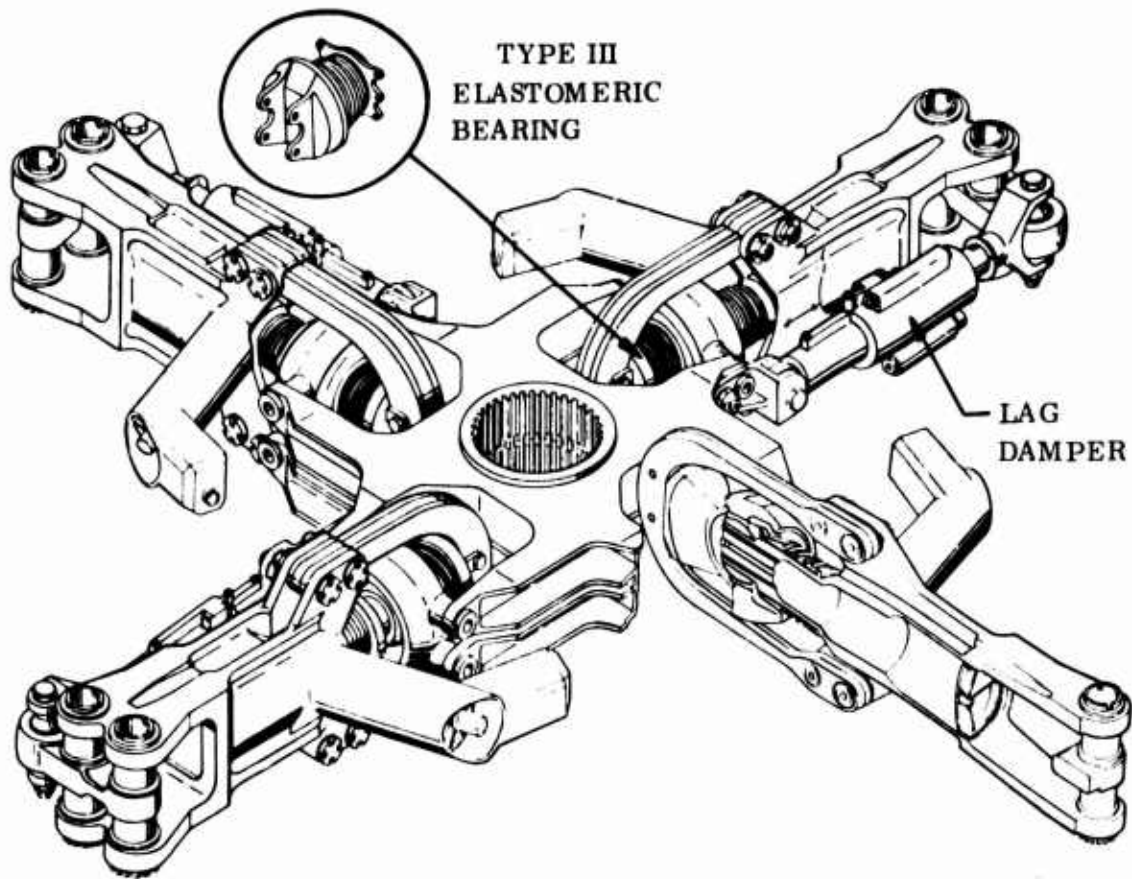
Type III (spherical) bearing on Boeing HLH rotor
